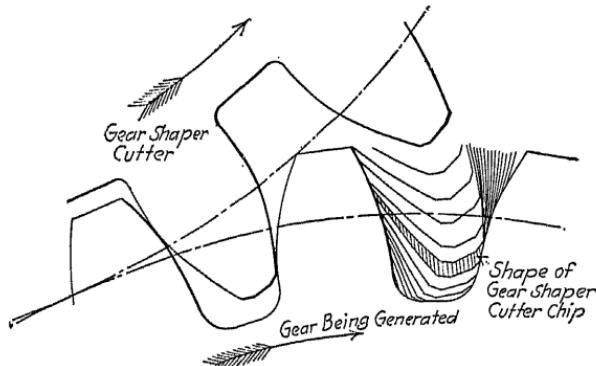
The cuts made by a generating cutter as it rotates with the work. Fellows Gear Shaper Co.
